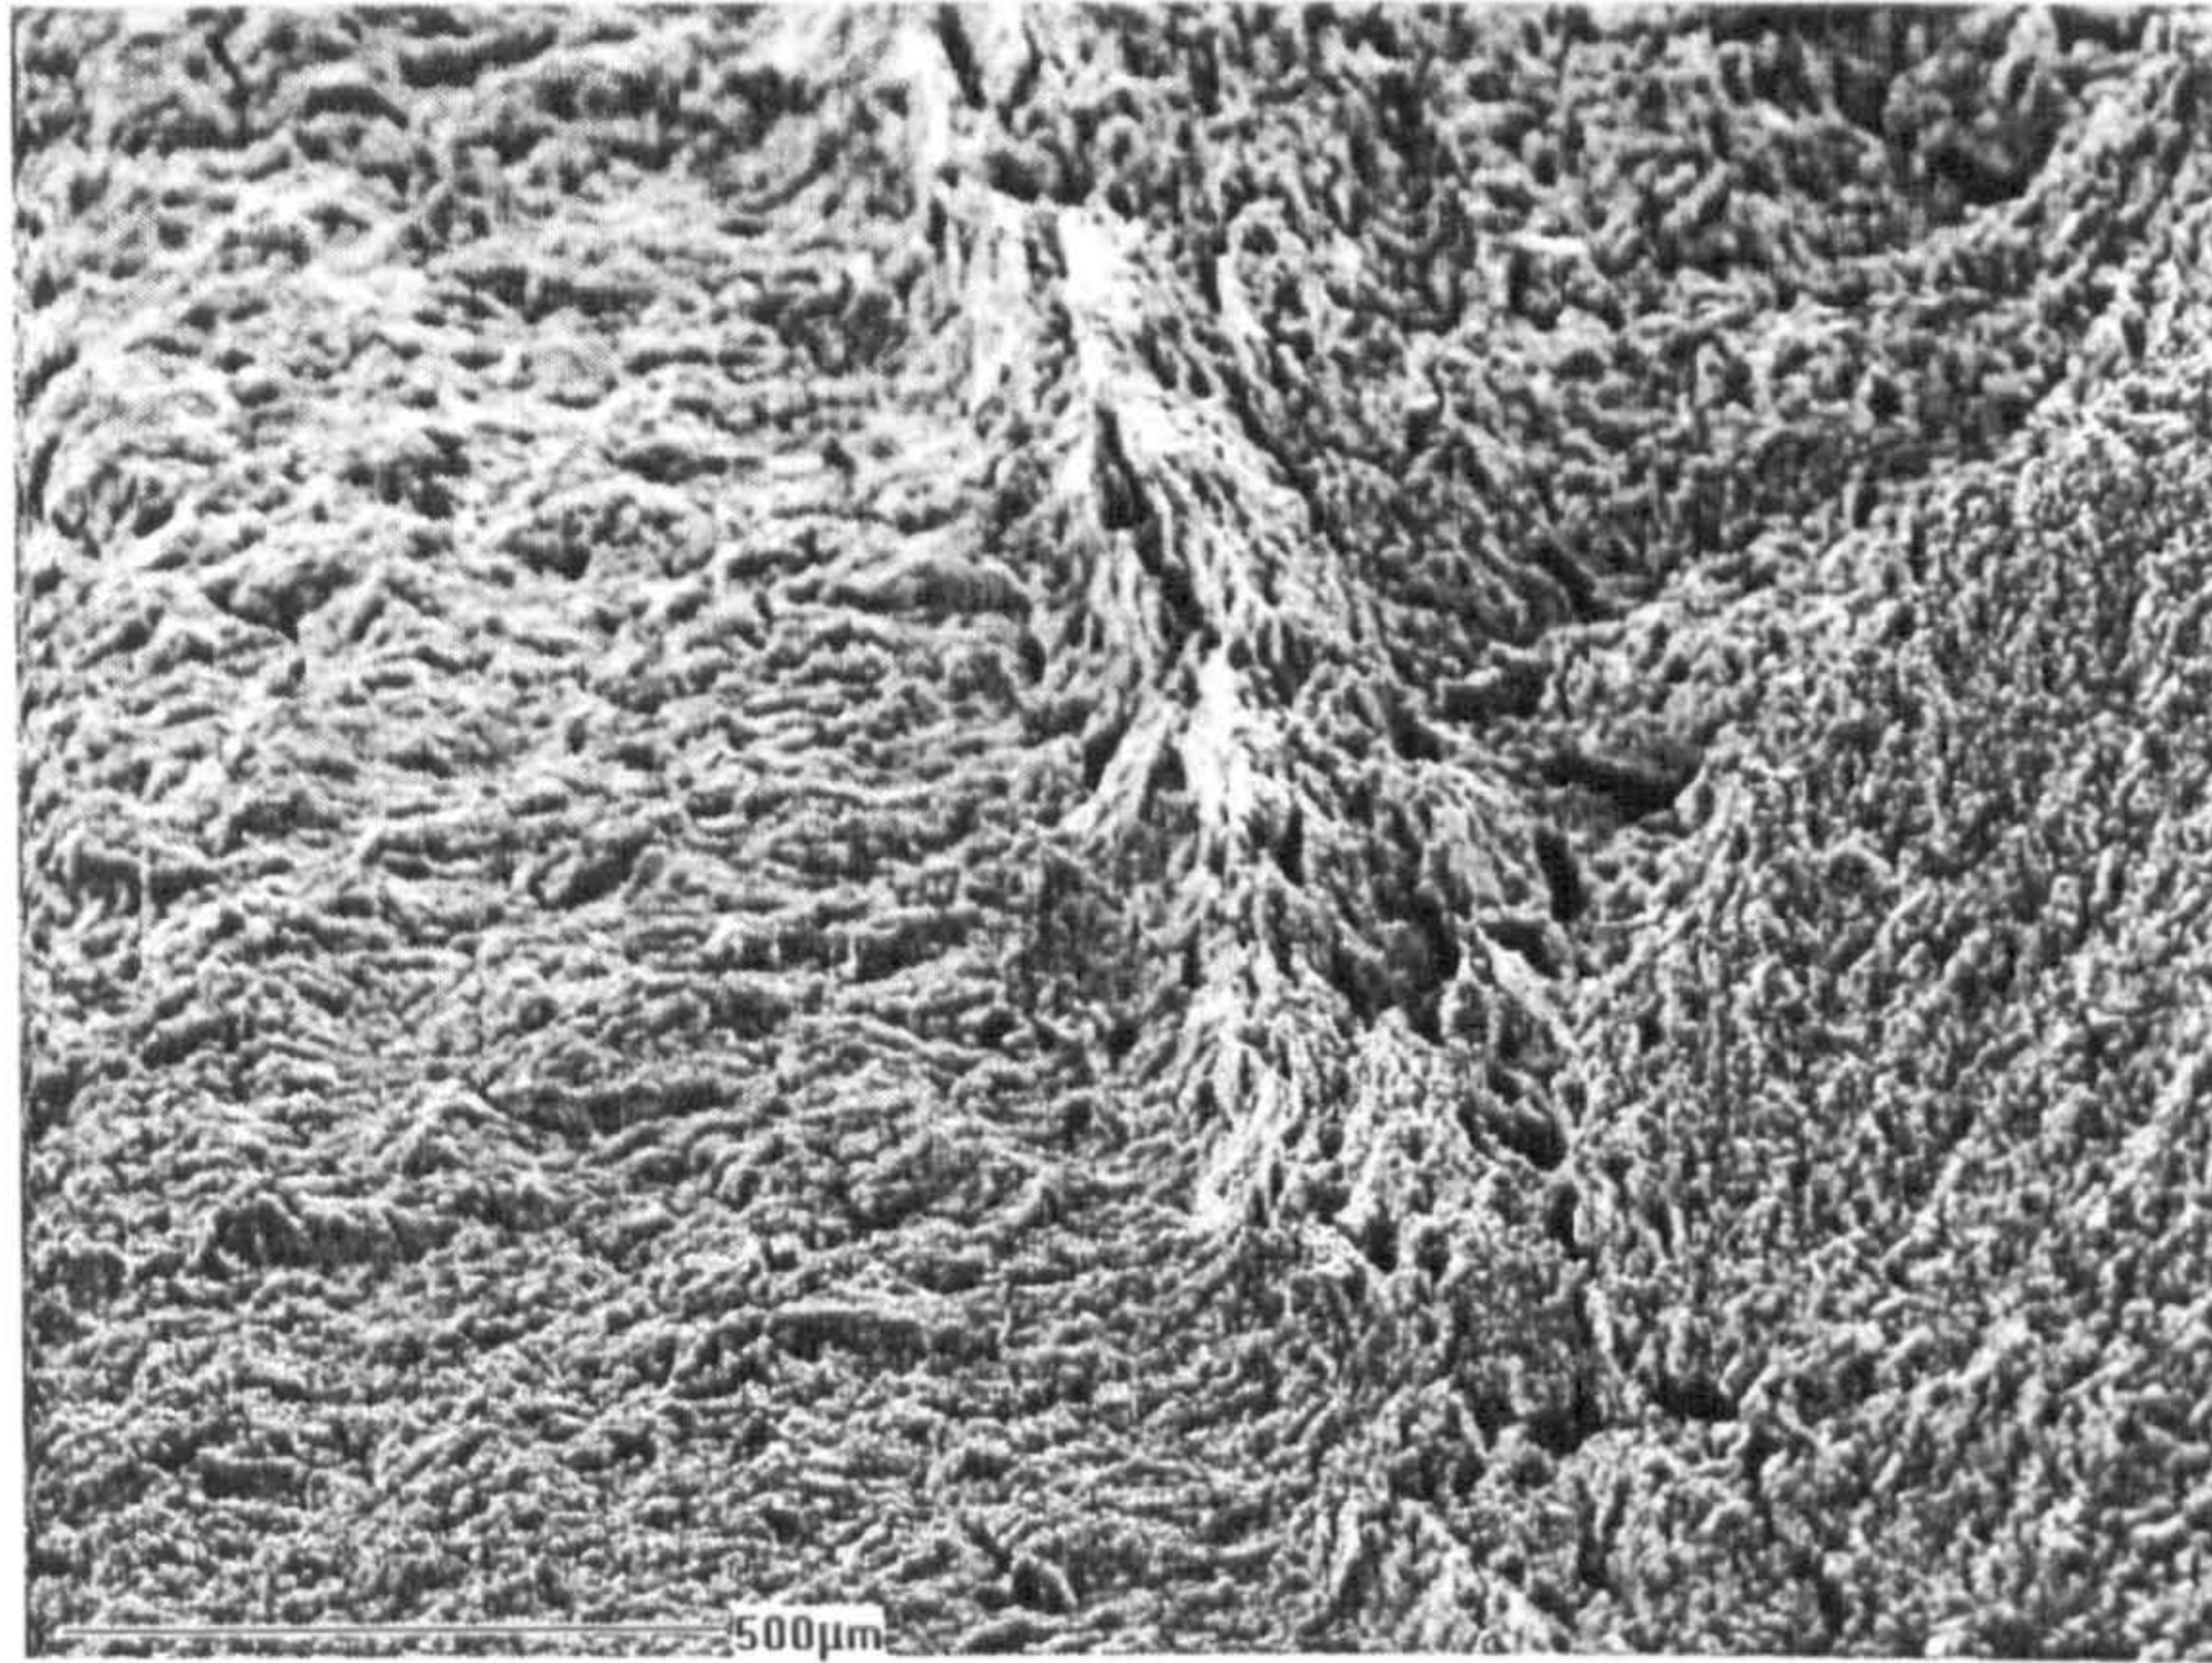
Fatigue precracked specimen, subjected to repeated load control testing showing voids at crack tip with cleavage fracture beyond damaged zone.
